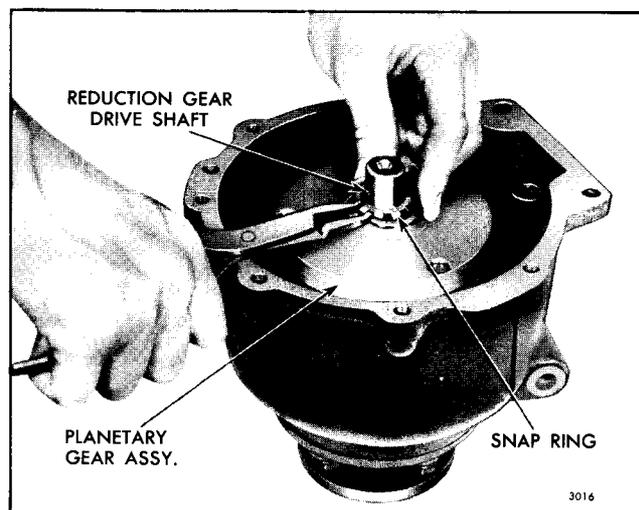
Removing or Installing Planetary Gear Snap Ring from/on Reduction Gear Drive Shaft (1.5:1 Ratio)
